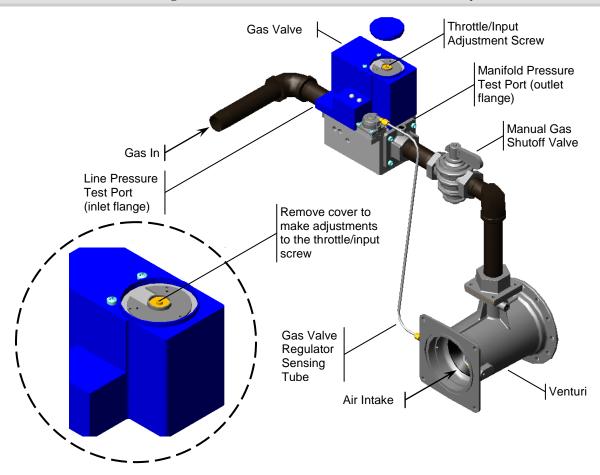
Lx600-800 Gas Valve and Venturi Assembly
